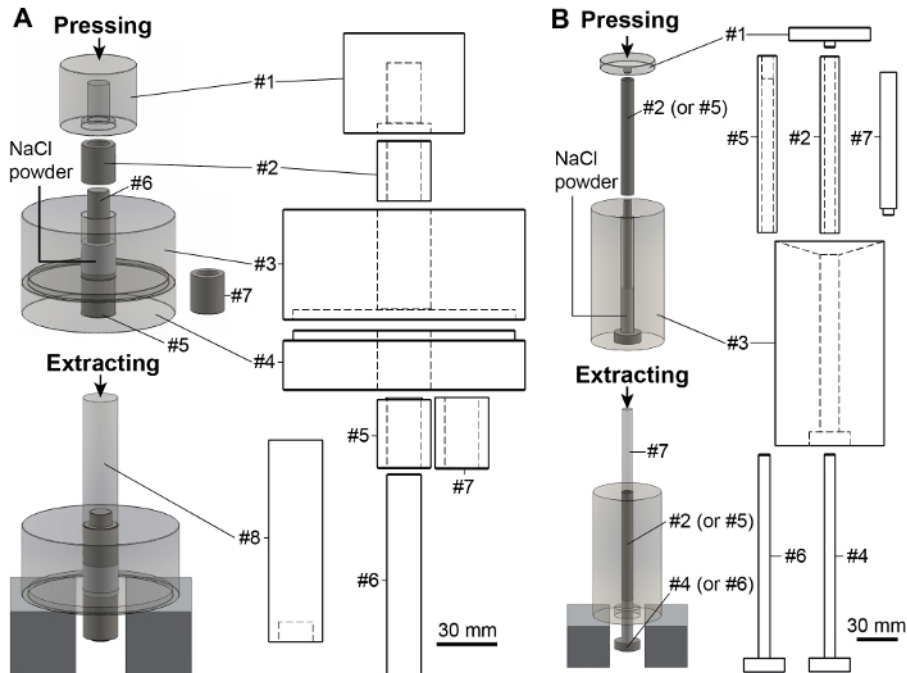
Tools required to cold press the outer and inner salt pieces from NaCl powder. A) 3D views during pressing (14 tons for 30 s) and extraction of the outer salt pieces (left), and scaled drawings of the related tool components (right). B) 3D views during pressing (6 tons for 30 s) and extraction of the inner salt piece (left), and scaled drawings of the related tool components (right). Some parts are shown in transparency. [Please click here to view a larger version of this figure.](#)
